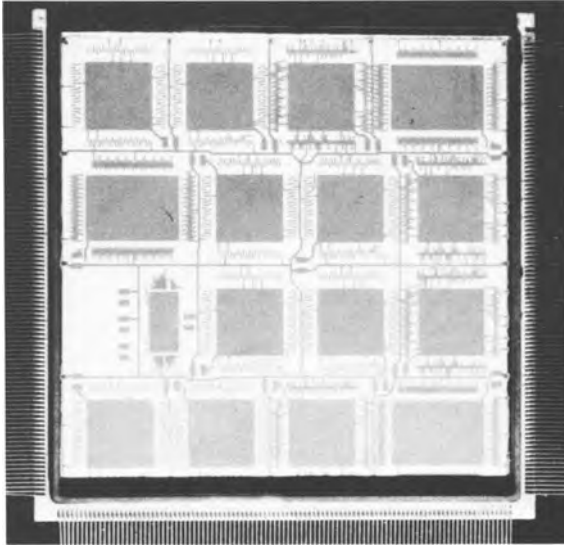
LTCC module demonstrating brazed leads and Kovar seal ring.
